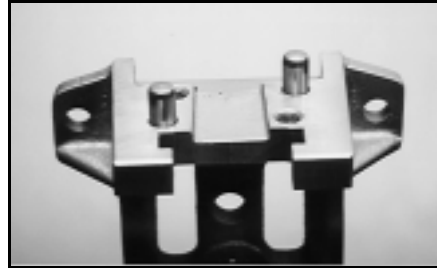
Joining the Comet Bed and Gap Bed together using M12 cap screws and M10 Allen key.
